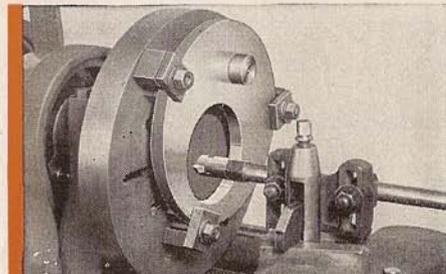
Boring an Eccentric in Work on Face Plate of the 9-inch "Workshop" Lathe.
